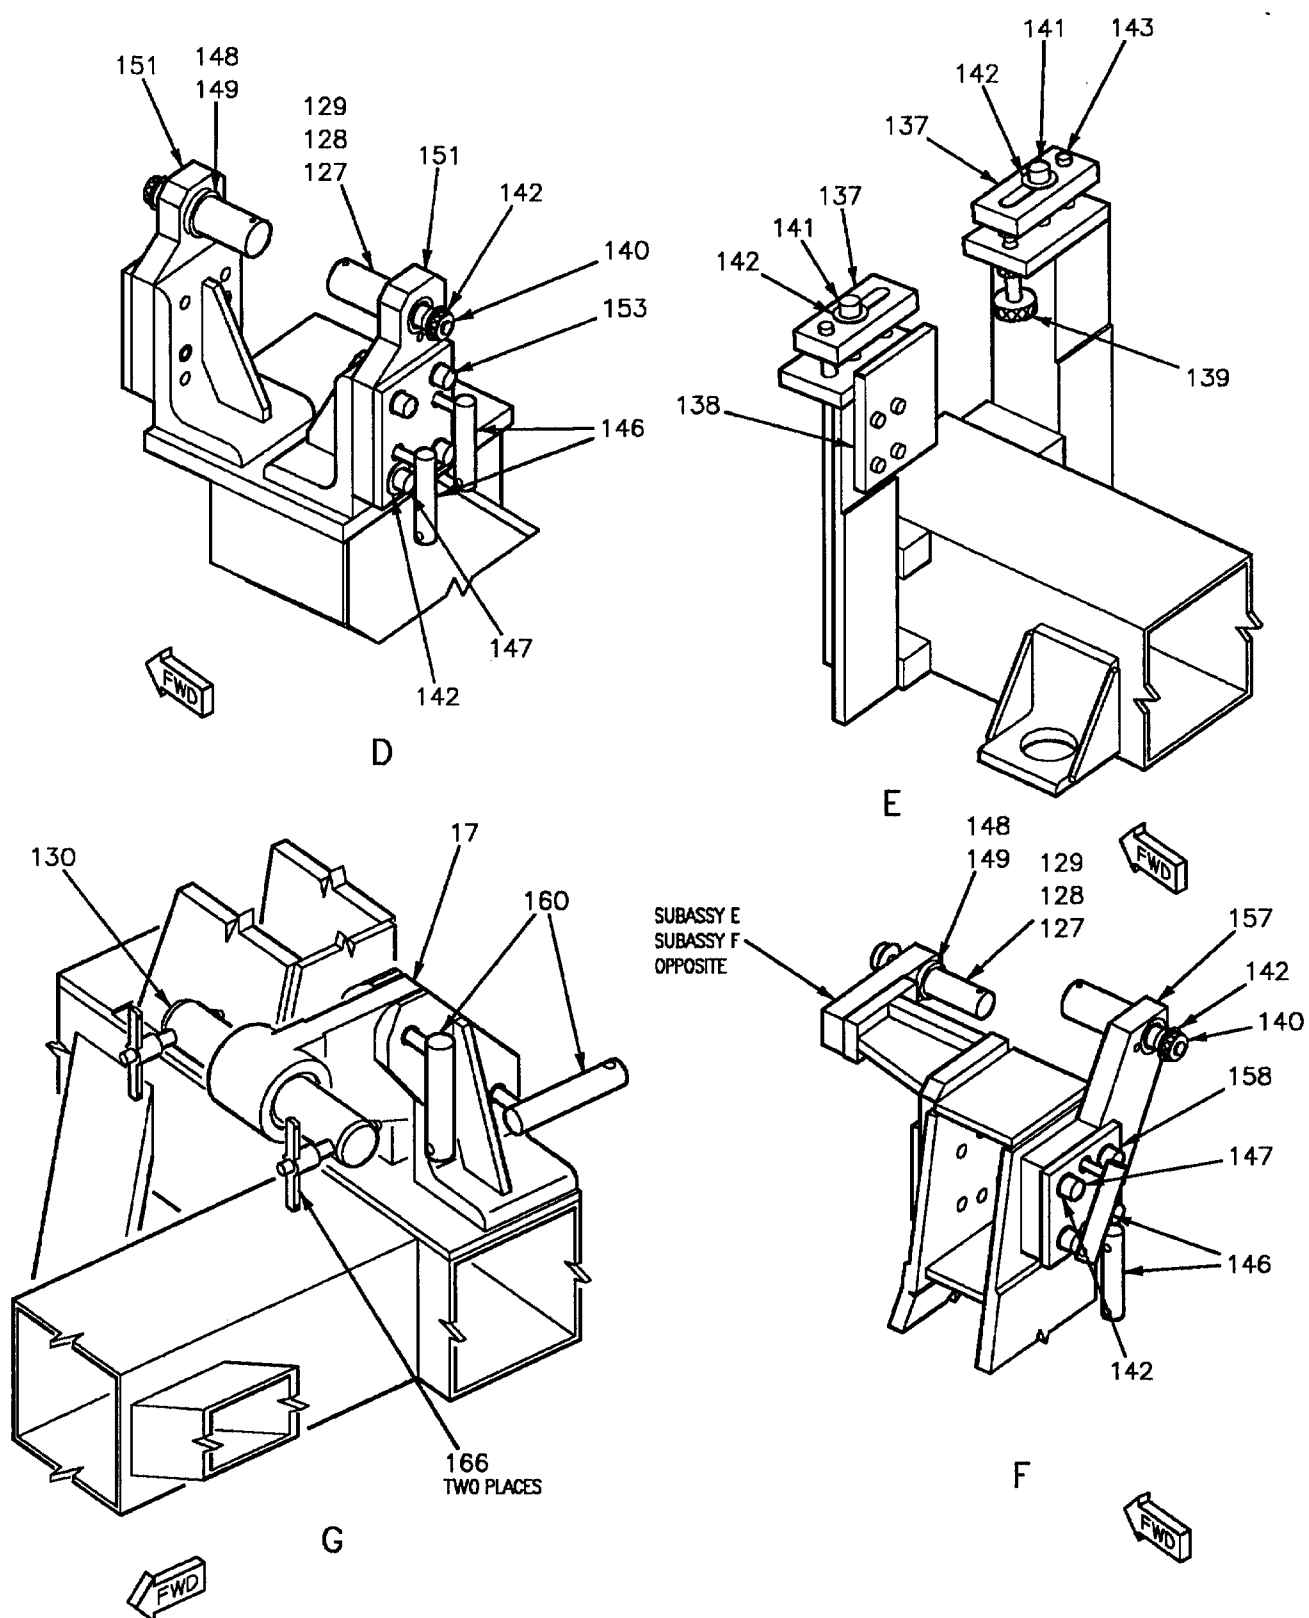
Installation of RE274332520-1, Alignment Device (Sheet 3)
